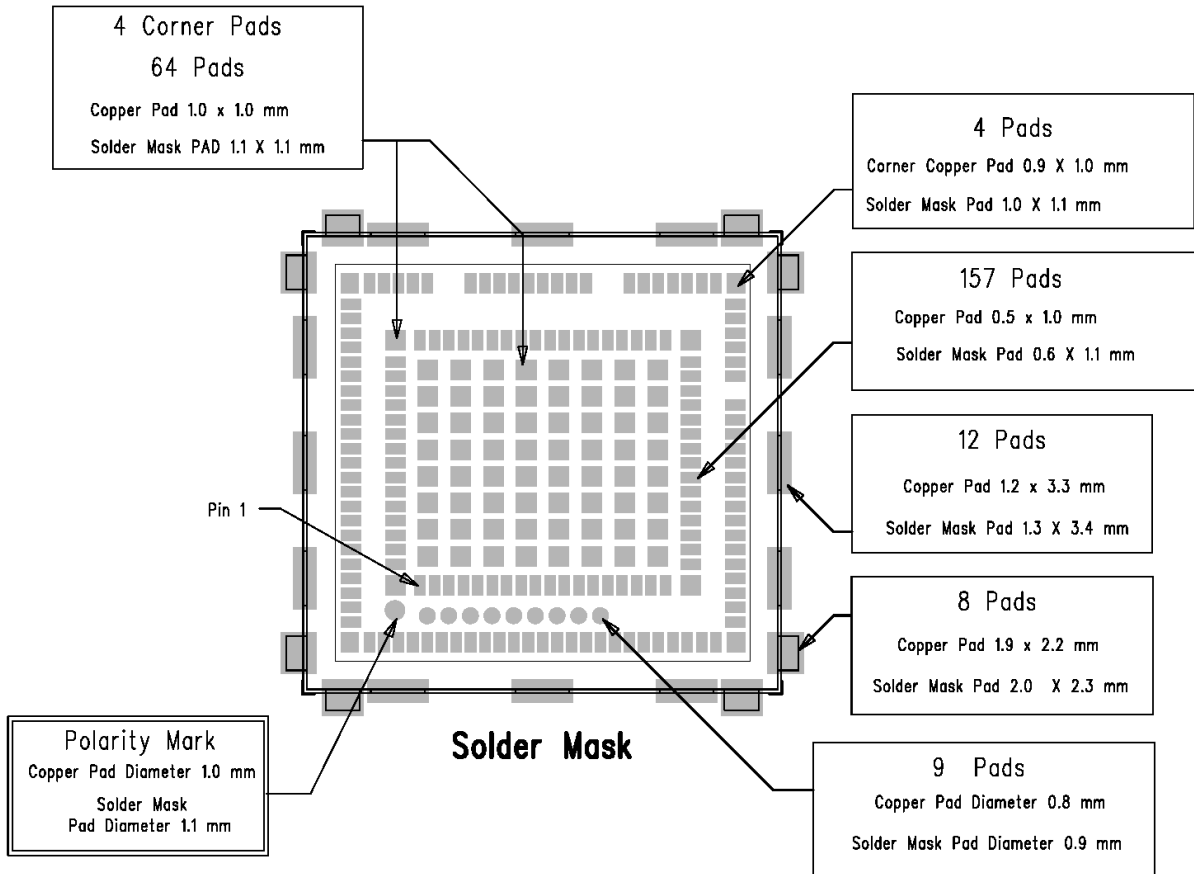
Recommended WP and RC76 Series Snap-in Socket Footprint – Solder Mask Layout
